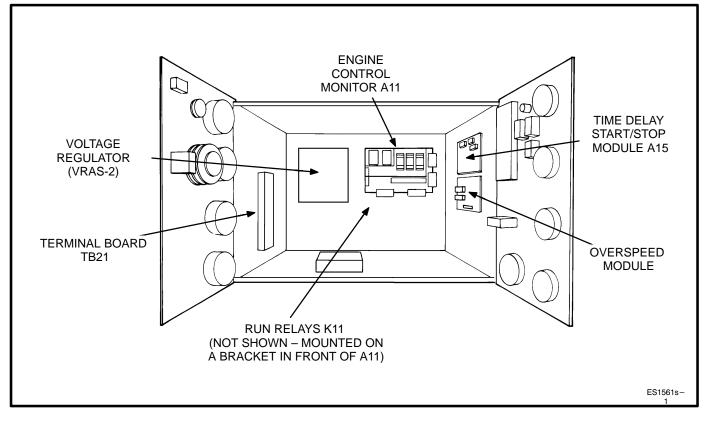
ARRANGEMENT OF COMPONENTS INSIDE THE CONTROL BOX
